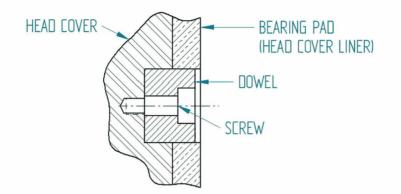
Example Dowel Concept Sketch to Secure Operating Ring Bearing Pads (NTS)
